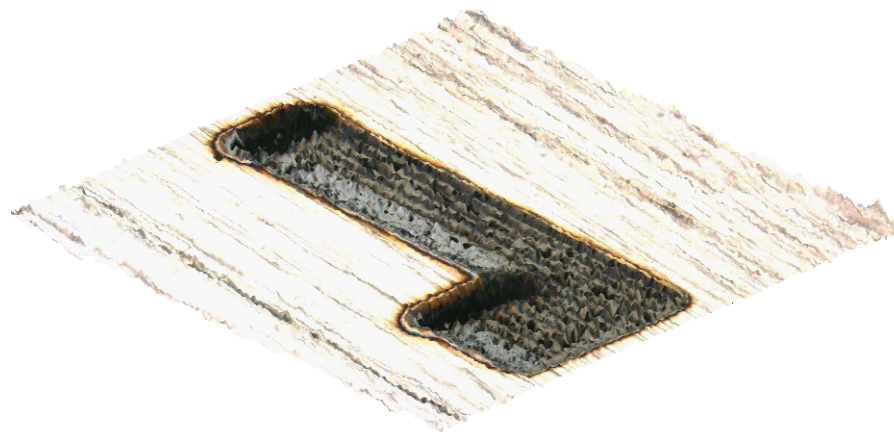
3D microtopography of the L-shaped pocket obtained by Fiber Laser micromachining on the surface of an AISI 304 stainless steel specimen.
